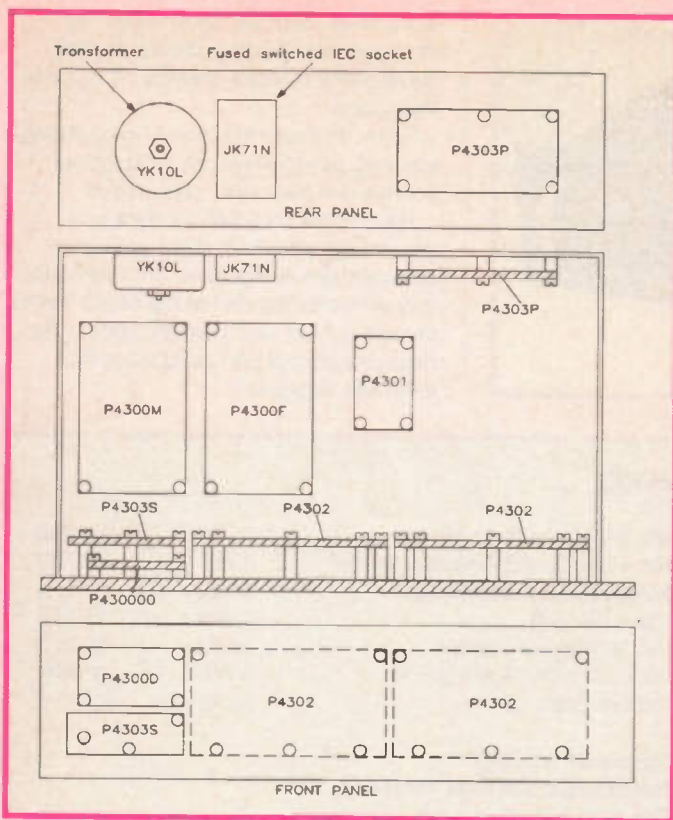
Layout of modules with transformer, fuse, IEC socket, etc.
